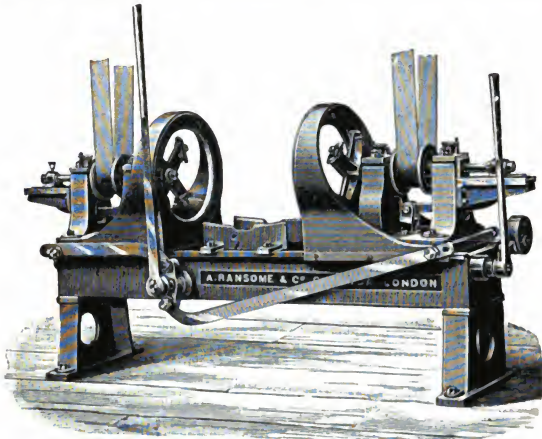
CHIMING MACHINE FOR SLACK CASKS.
